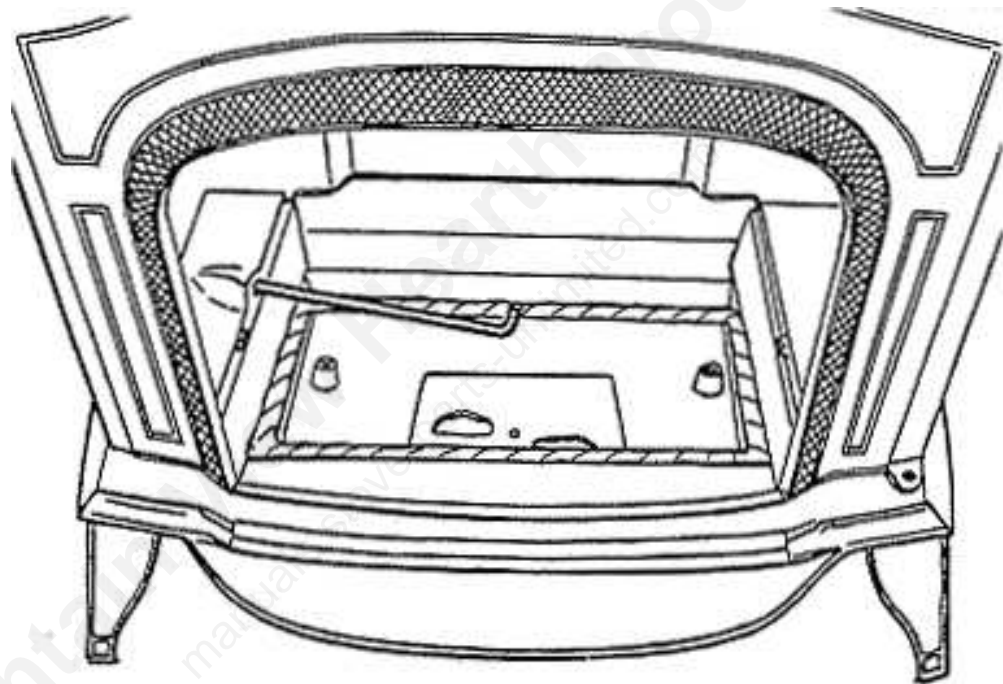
END VIEW OF THE LEFT SHOULDER PLATE WITH THE GRATE ROD IN PLACE
